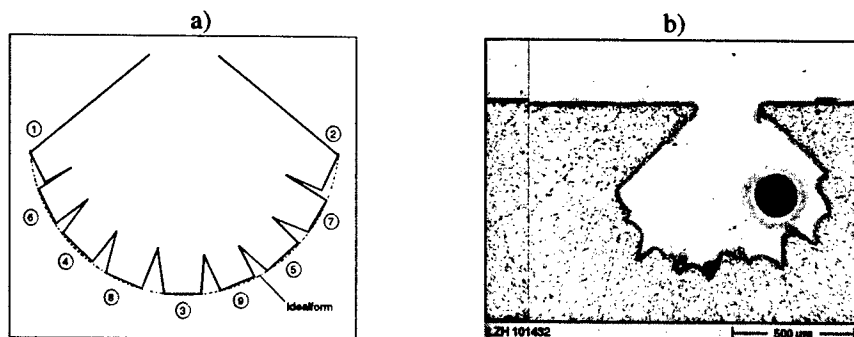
Machining of a buried cavity: a) Model with the numbered drilling sequence b) Machined in ceramics (A997)
